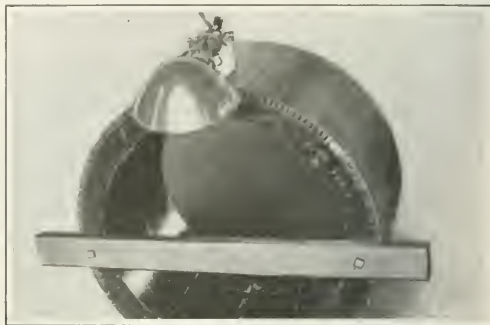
Rough-bored Hole in Strut with Parallel Strip secured to End of Casting
